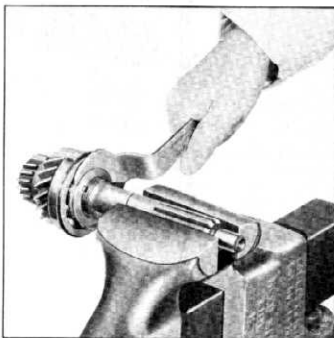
Removing Bearing Retainer Nut and Oil Slinger
